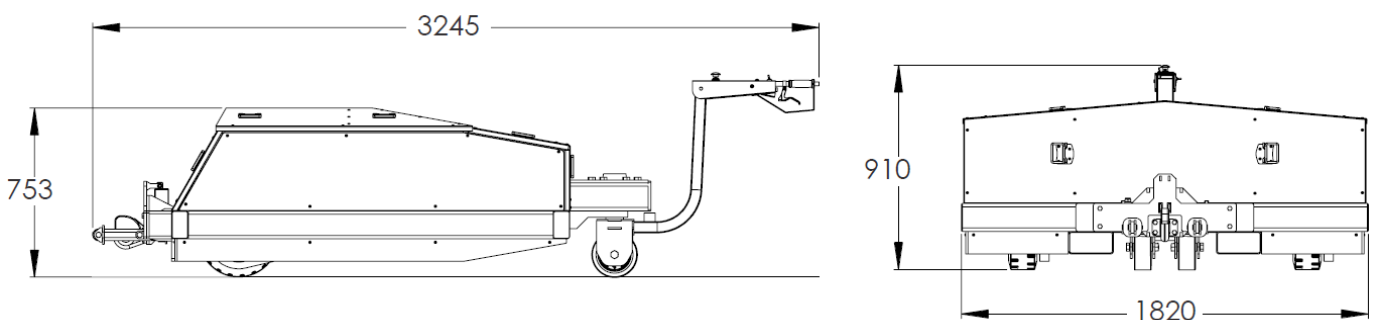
Main Parts of 20T Tug Tough Machine
